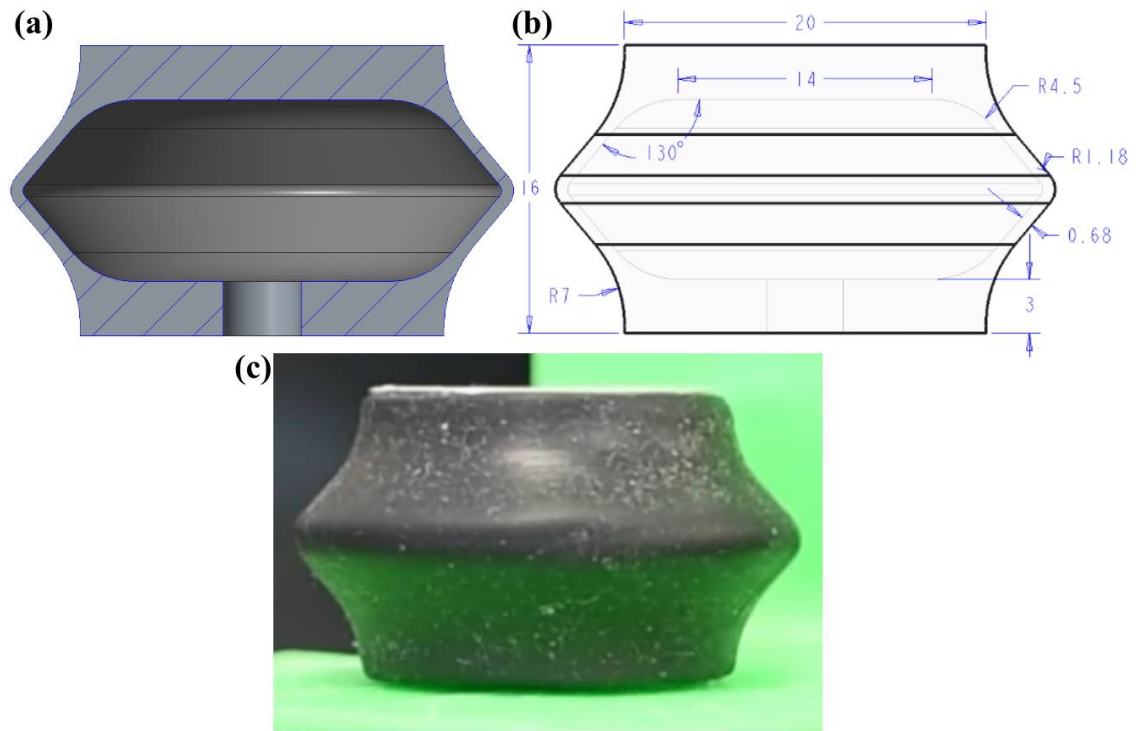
A one chamber 20 mm face diameter LSOMMA: (a) cross-sectional side view, (b) side view with dimensions labelled, and (c) photo.
